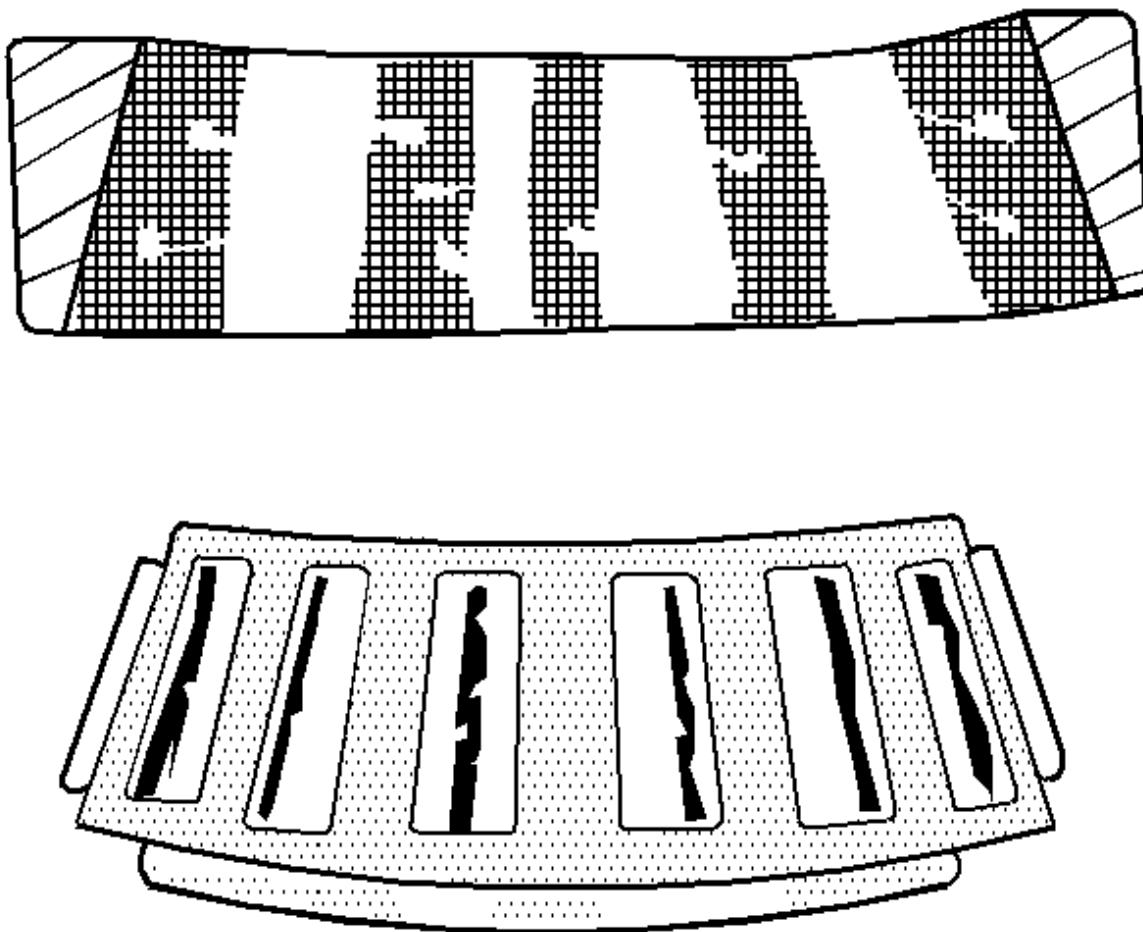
Inspecting Bearing Rollers & Races For Heat Discoloration
